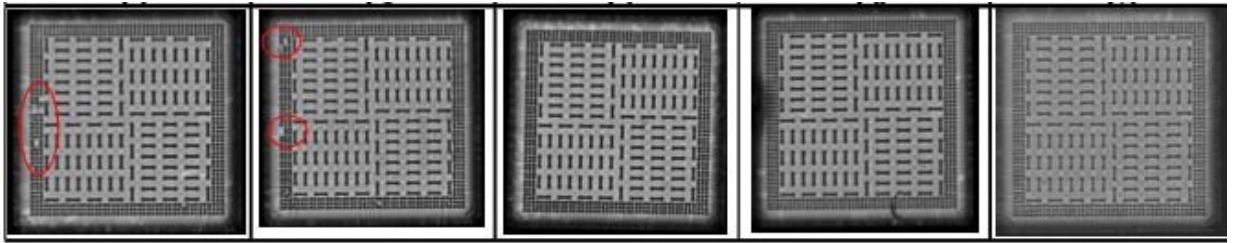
Final BT assemblies with good electrical yield and no voiding (red circles show missing bumps from the die side due to fabrication defects)
